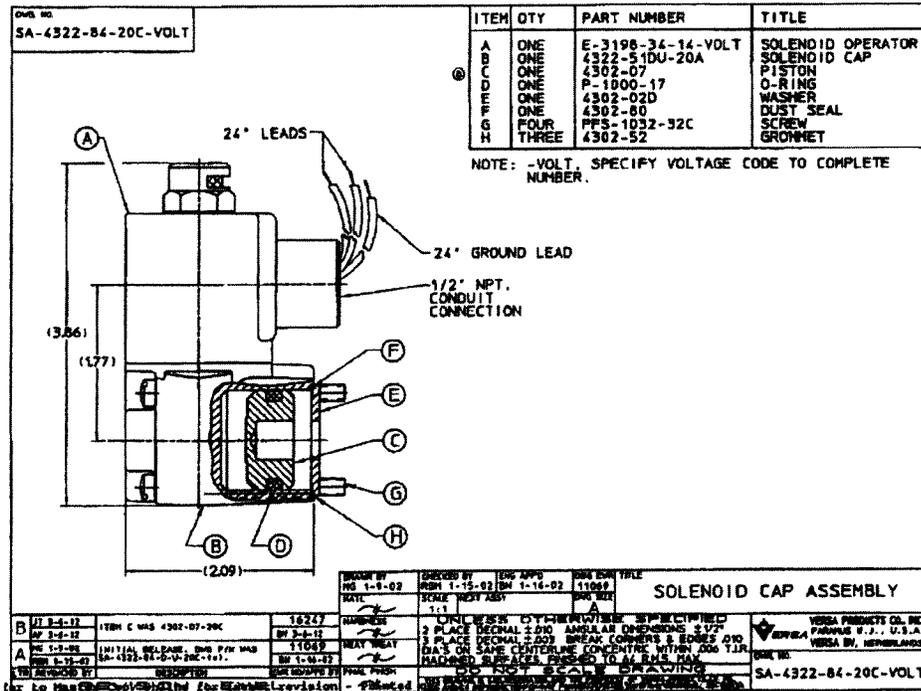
Engineering Drawing of Versa Valve Part No. VGK-4523-20C-D0
